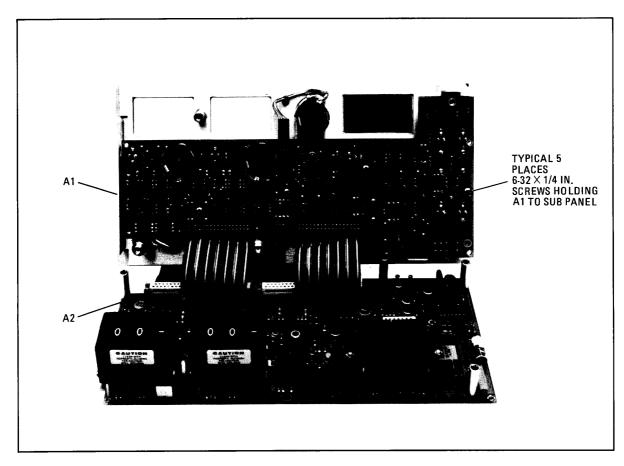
Front Panel Assembly With A1 and A2 Separated
